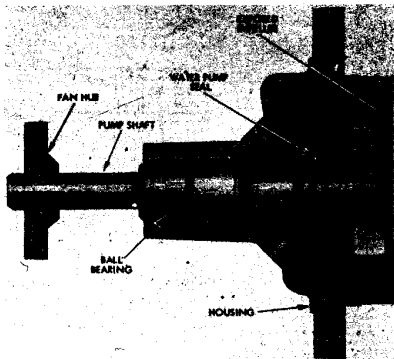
The impeller on this water pump remains exposed until the pump is bolted to the engine block.
